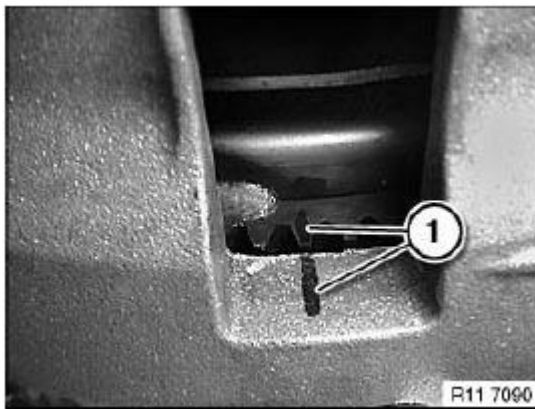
Identifying Flywheel And Transmission Housing Aligning Mark
